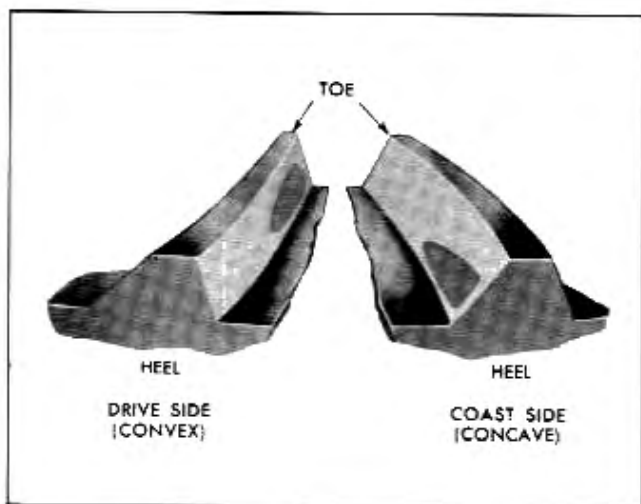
Tooth Pattern When Pinion is Too Close to Ring Gear
